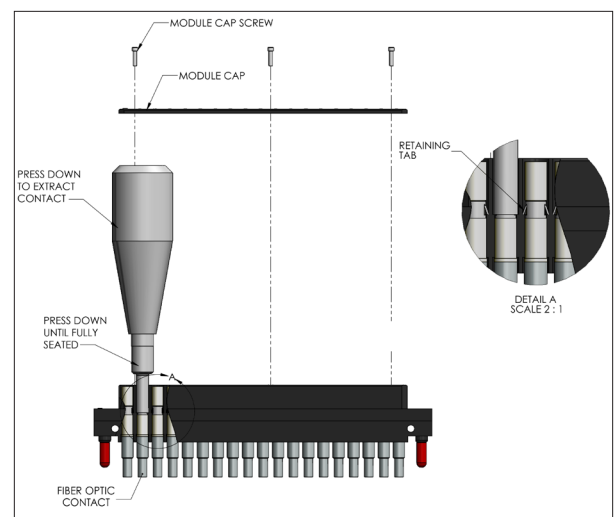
Figure C. Be sure to keep the tool perpendicular to the module to avoid damaging contacts.
